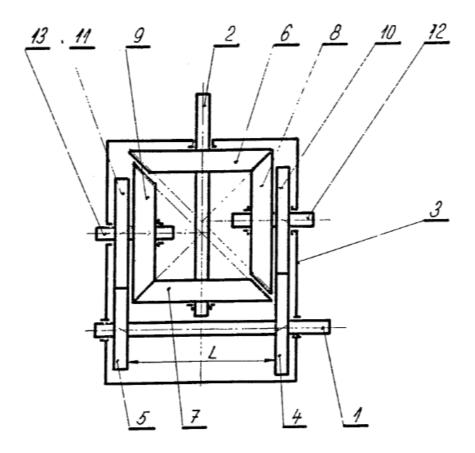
illustrates a toothed gearing with a fixed gear ratio and eight intermeshing gears. Torque from driving shaft (1) is divided between intermediate shafts (12) and (13) and summed at driven shaft (2).
